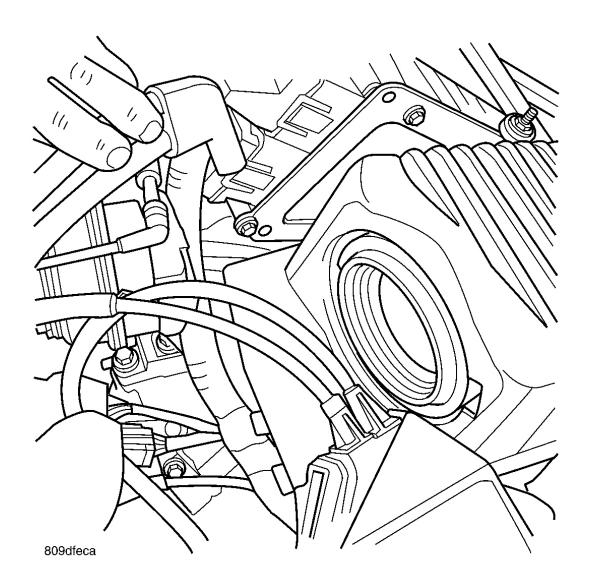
Identifying Air Filter & Housing Courtesy of CHRYSLER LLC
